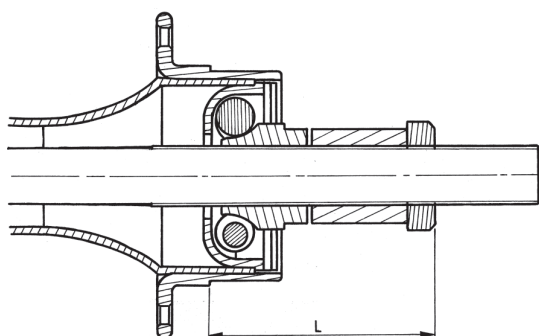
HUB AXLE DIMENSIONSTable 6 Sizes of Hub Axle Threads
